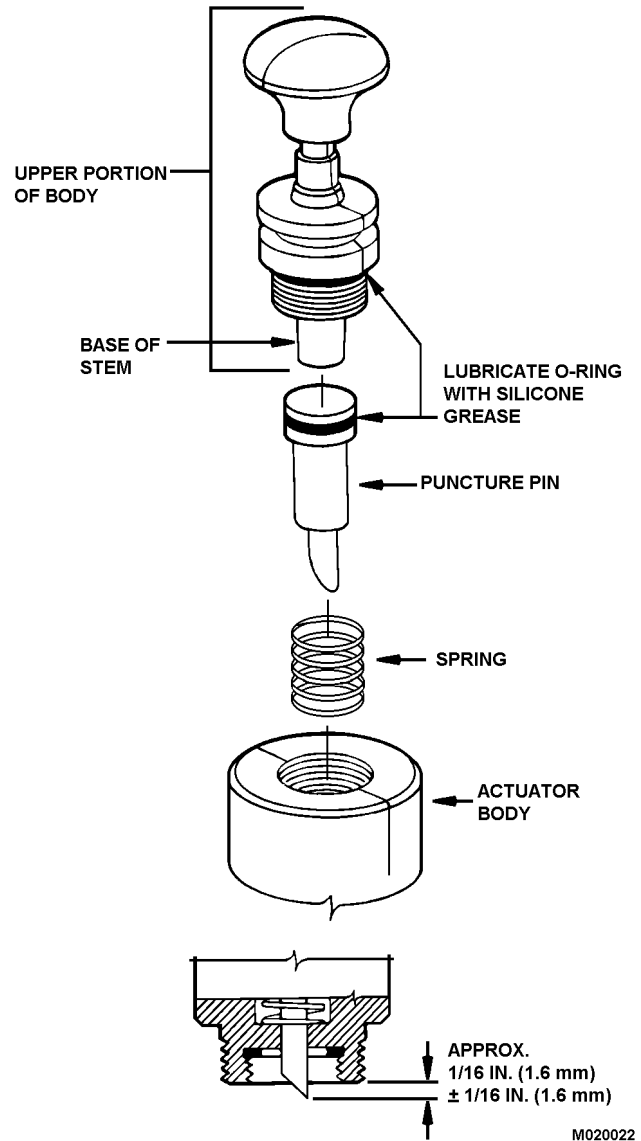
ACTUATOR ASSEMBLY
